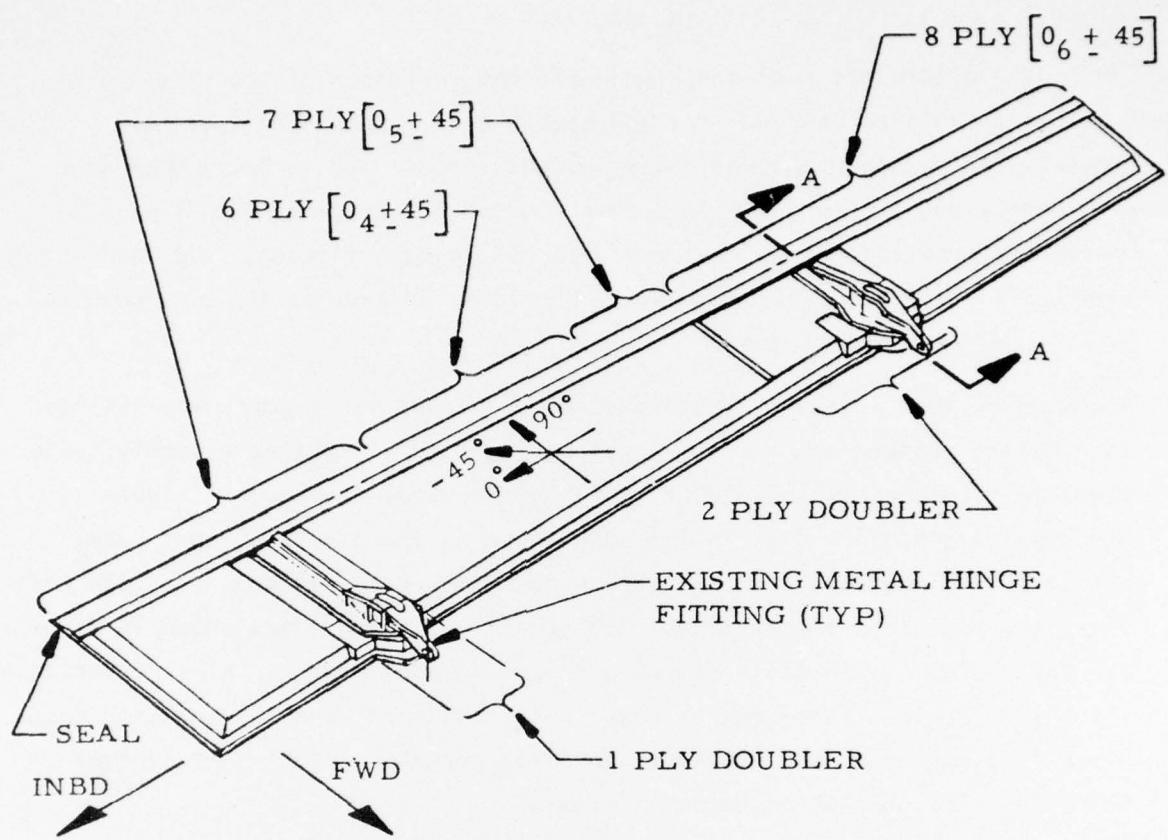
COMPOSITE SPOILER ASSEMBLY
